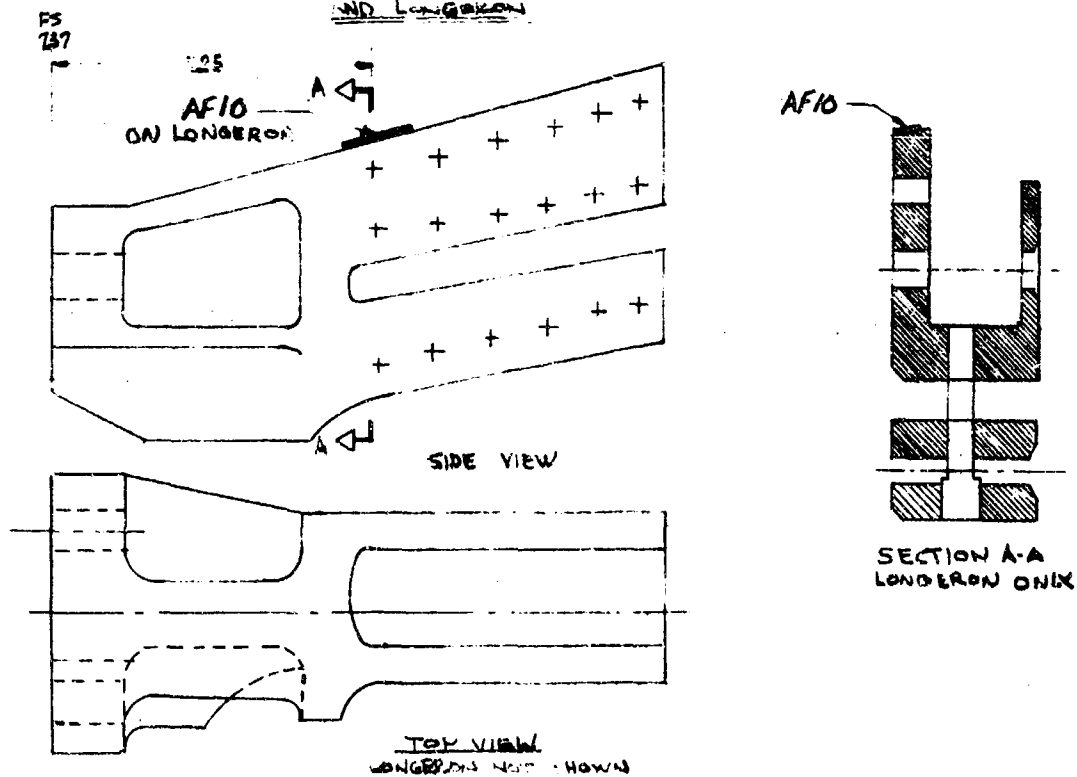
LOWER BLG1 LONGERON FITTING ASSEMBLY
